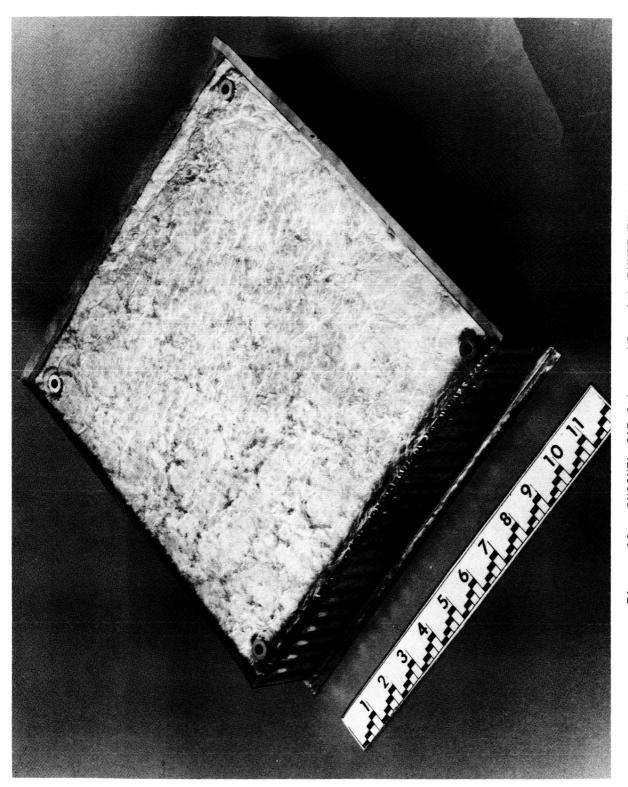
INCONEL 617 Subassembly with DYNAFLEX and Q-FIBER FELT Installed
